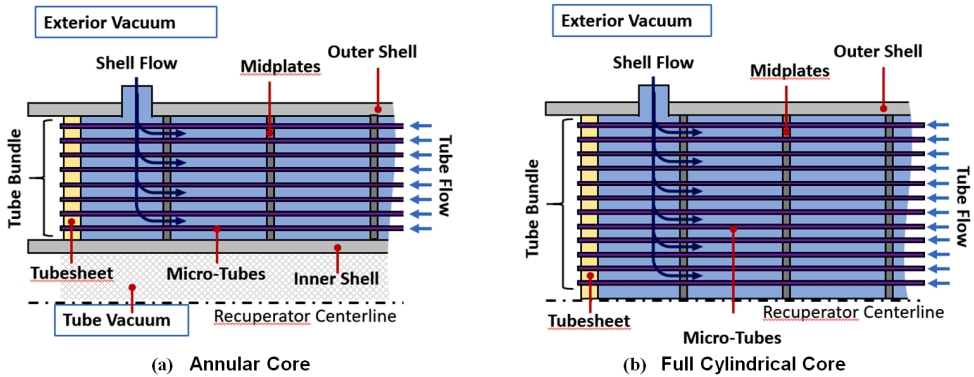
Illustration of microtube recuperator core layout. Relative to the legacy annular core arrangement (a), the fully cylindrical core (b) populates the core interior with microtubes, leading to a more compact, lightweight design. The cylindrical core also eliminates the inner shell, reducing parasitic axial conduction and further reducing weight.
